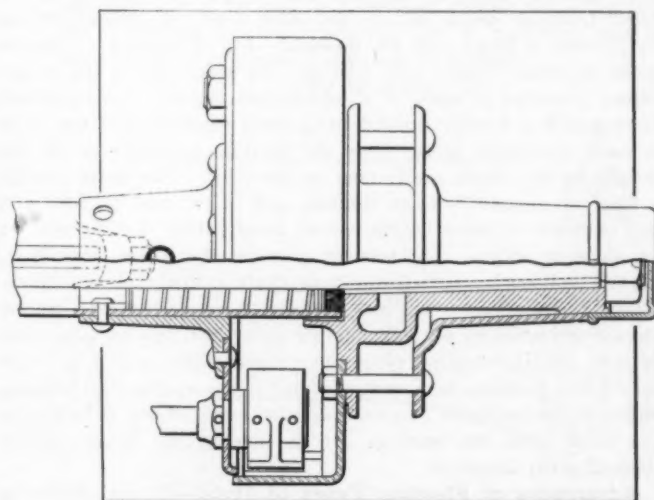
Hub for live rear axle showing Hyatt roller bearings and felt closure, also close nesting and light weight.
